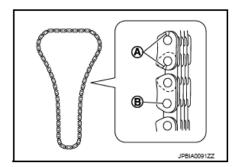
Checking Timing Chain For Cracks And Any Excessive Wear Courtesy of NISSAN NORTH AMERICA, INC.
